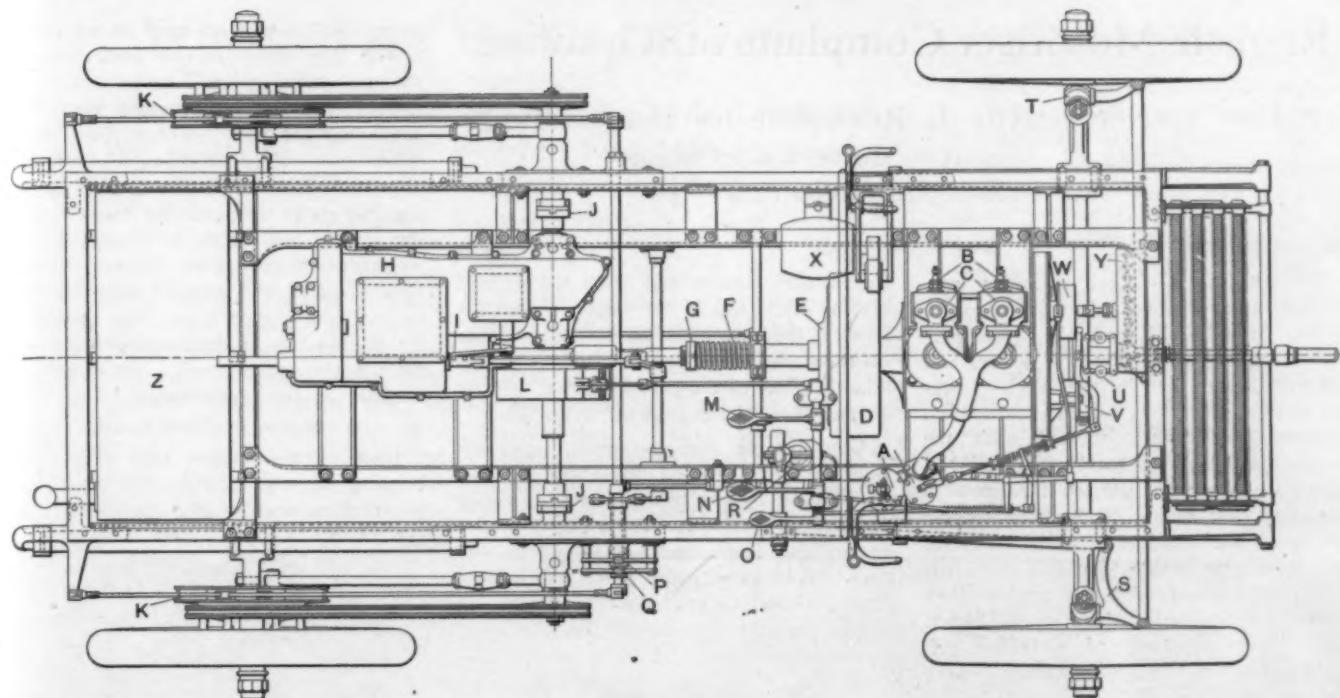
PLAN VIEW OF CHASSIS OF MODEL VII SEARCHMONT TOURING CAR, FITTED WITH TWO CYLINDER TEN HORSE POWER GASOLINE ENGINE AND CHAIN DRIVE.
